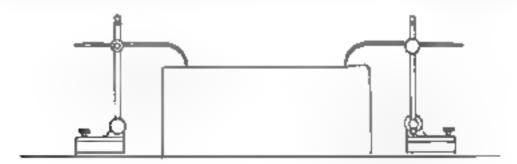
I same a surface gage to test a rough surface for paradelism with the table of a machine tool.
